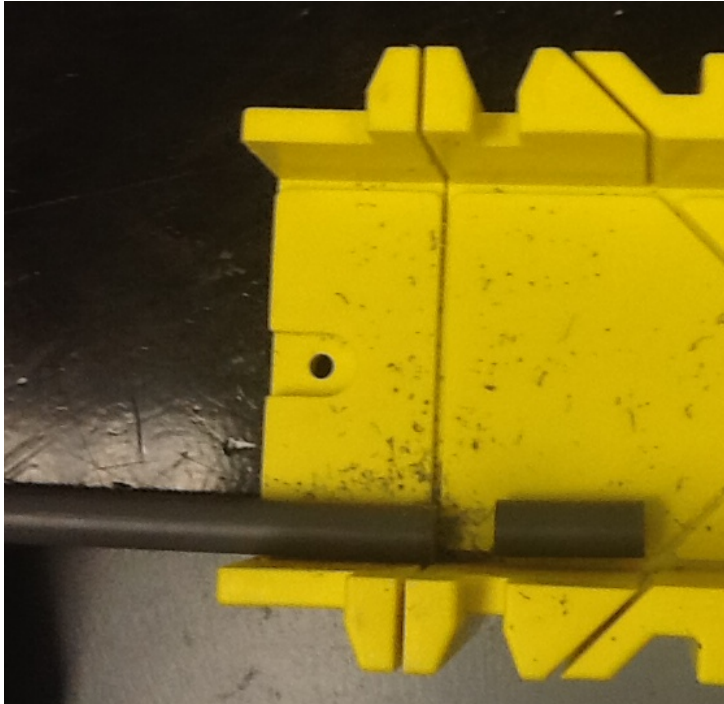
1: Fabrication of socket step 1. The PVC rod was cut into 1-1/4" pieces using a PVC saw and miter box.
